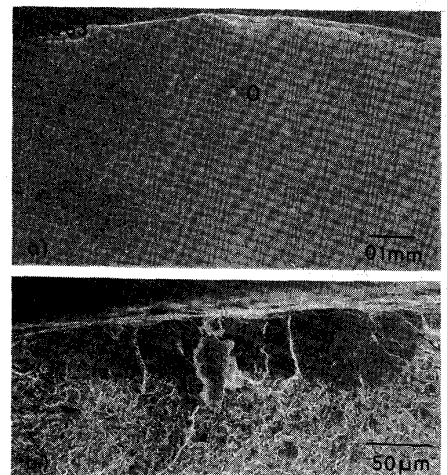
Fractographs (a) fish eye failure, (b) surface crack
